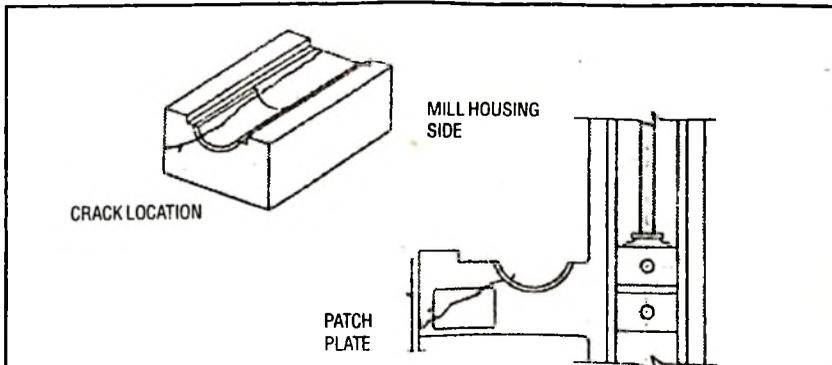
Location of breakage at second feed roll housing of 46" Mill housing
